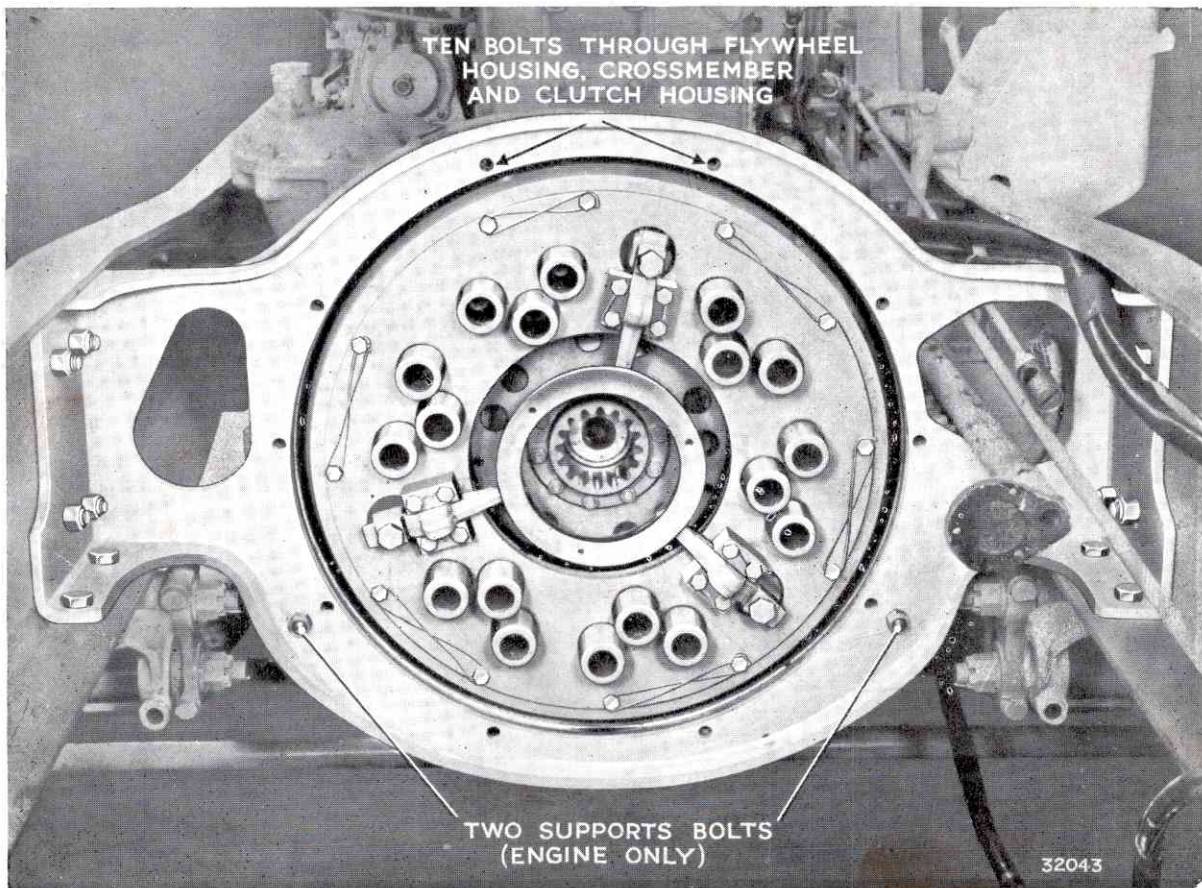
THE CLUTCH WITH GEARBOX REMOVED ON THE HEAVY GOODS VEHICLE
